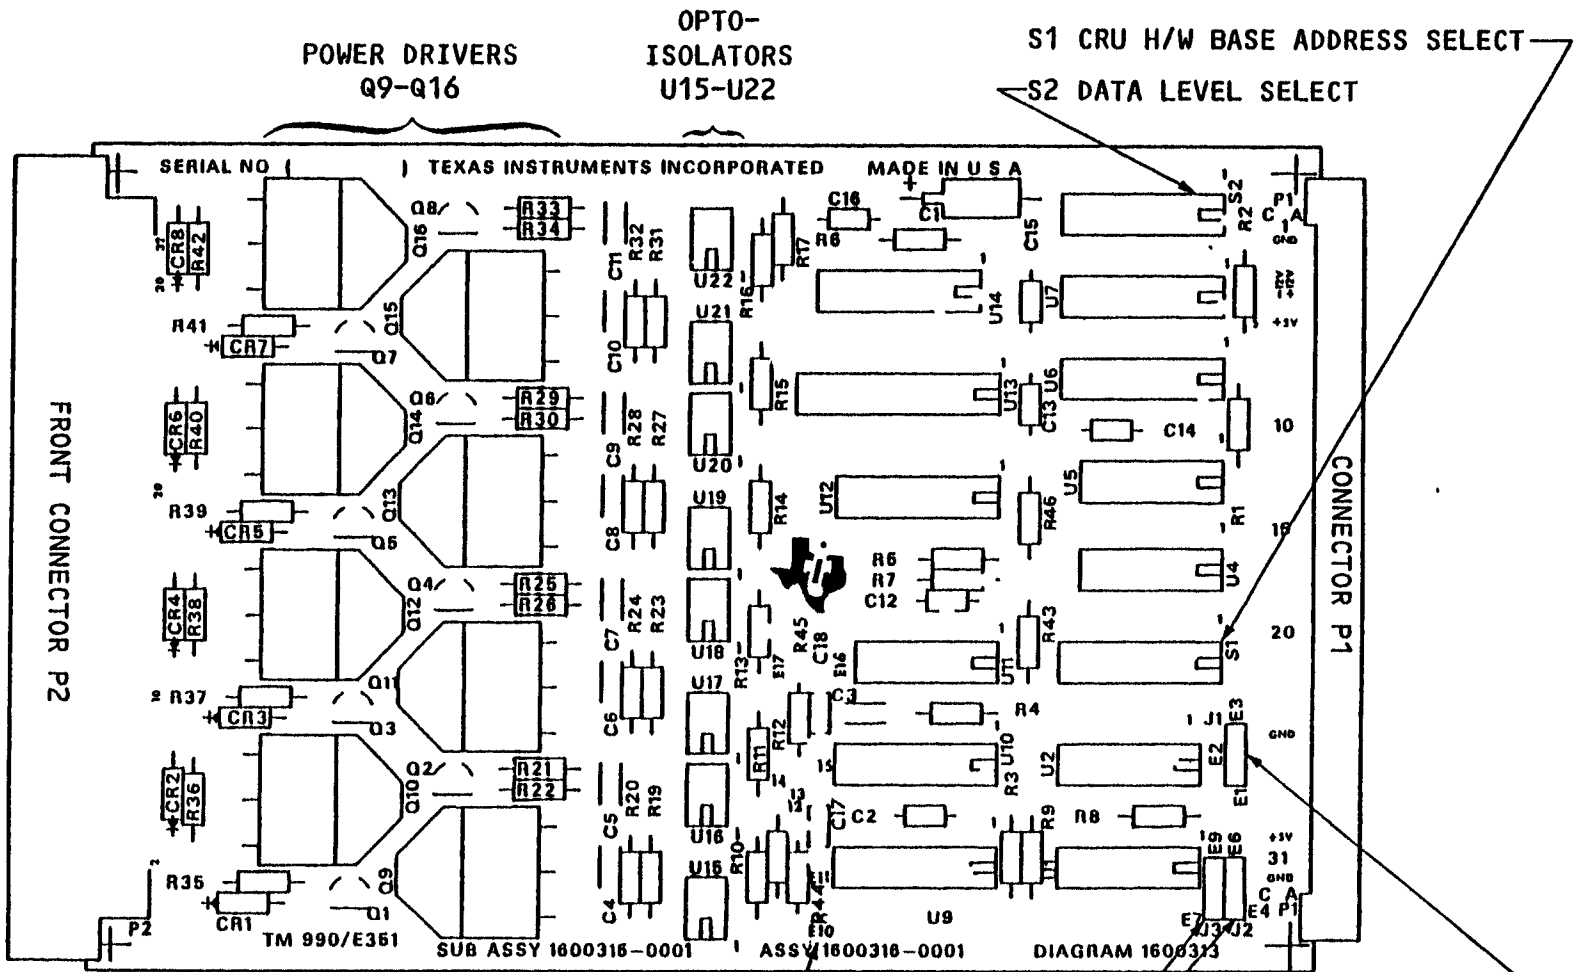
TM 990/E351 MODULE DIMENSIONS
